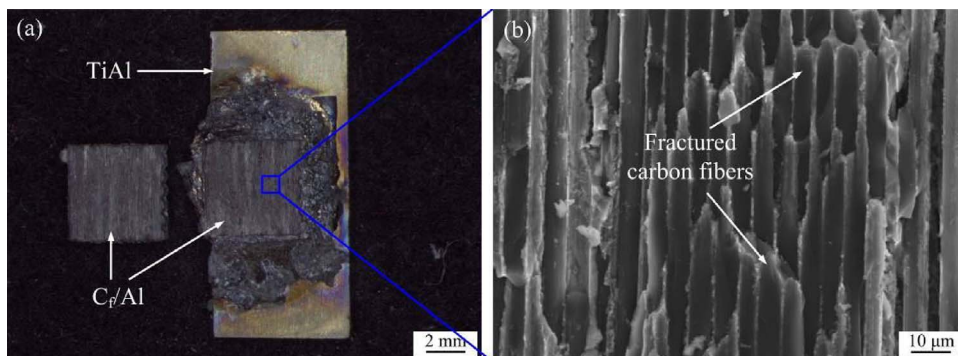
Fracture of the joint. (a) Overall morphology; (b) fracture micro morphology.
